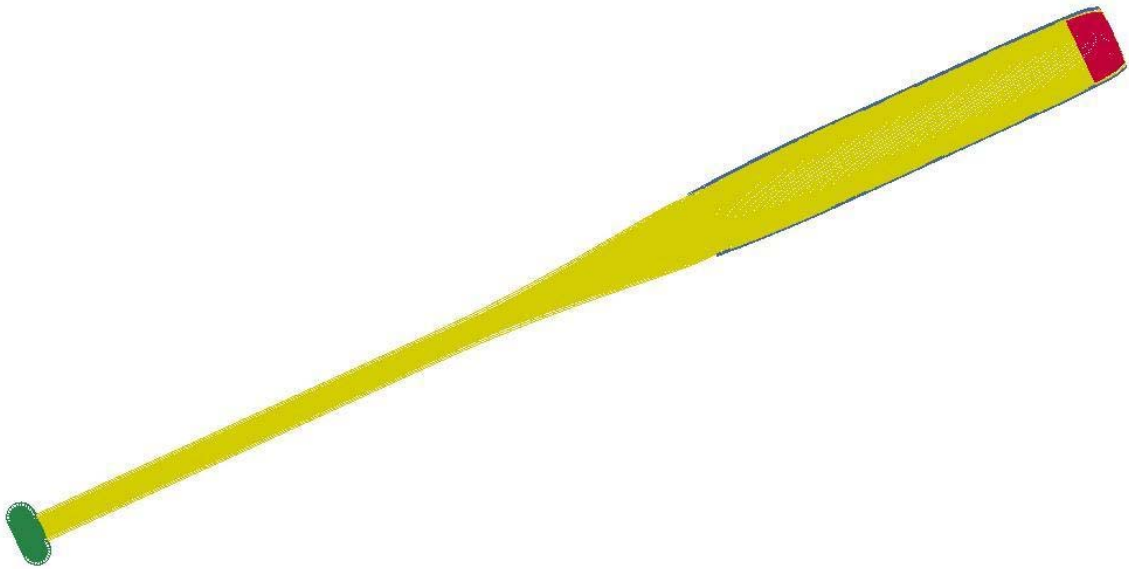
Sectioned view of multiple-wall aluminum bat model
